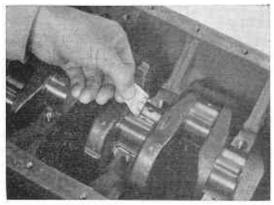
Checking Main Bearing Bushing Oil Clearance
